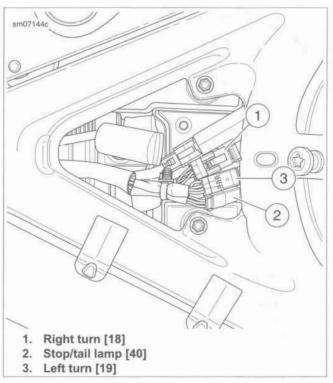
Rear Lighting Connectors: XL 1200C/CP/CA/CB
